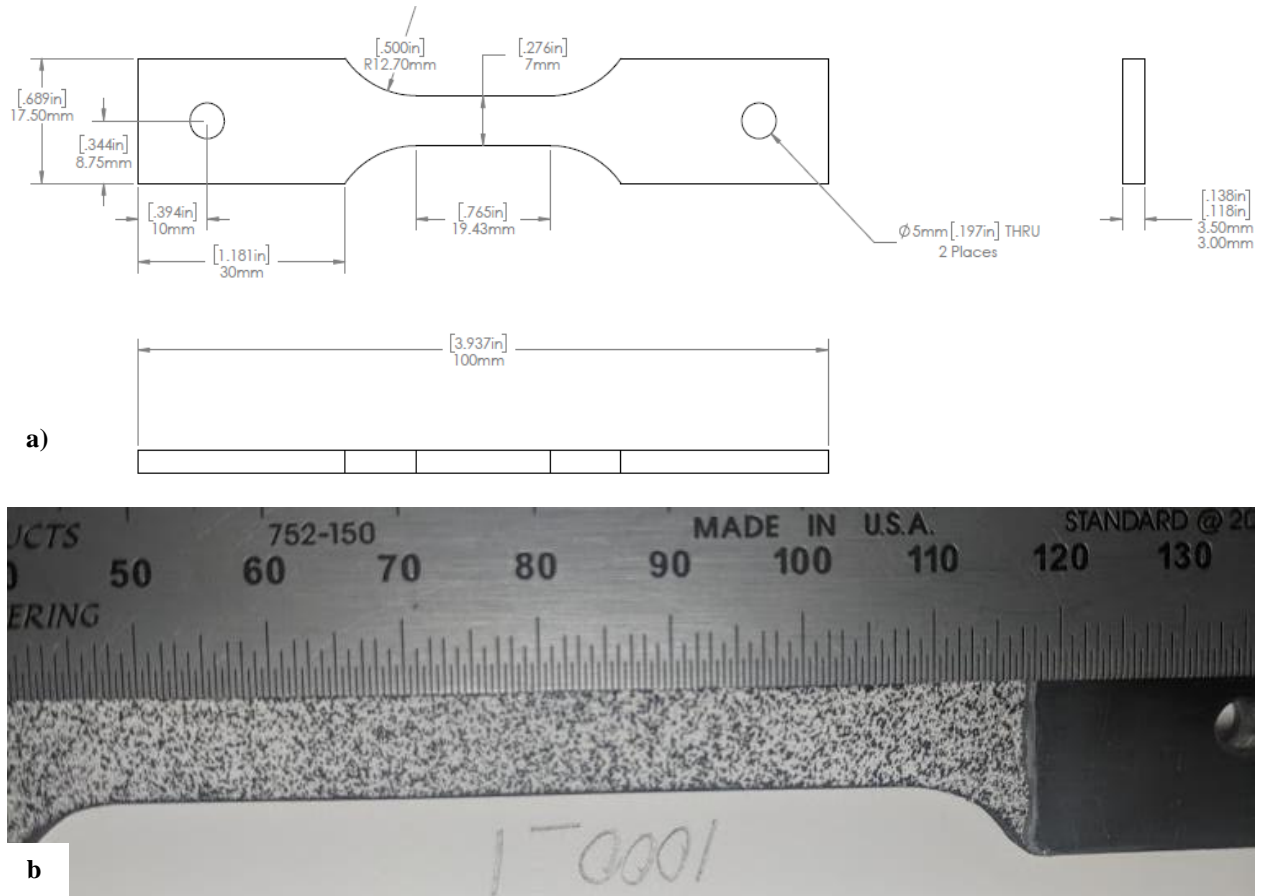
Tensile specimens for Gleeble-based mechanical testing of HY-80 steel: a) dimensions for single-reduced gauge section, b) sample speckle pattern for DIC testing (dimensions in mm).
